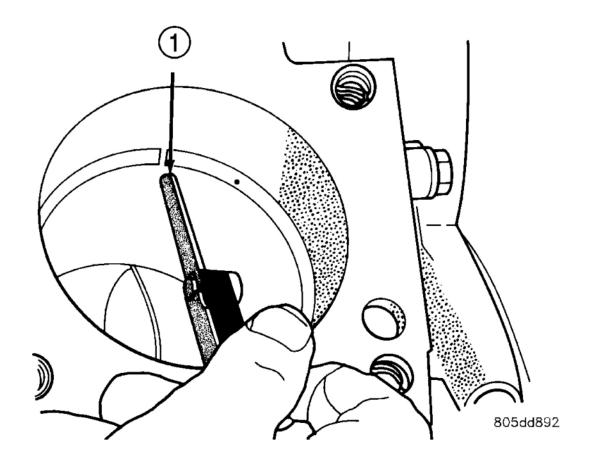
Checking Ring End Gap Courtesy of CHRYSLER LLC
